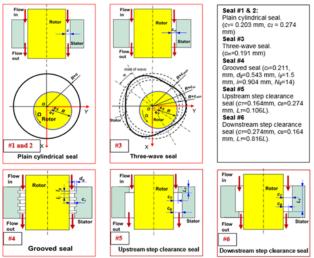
Schematic views of six test seals: plain, wavy, grooved and stepped configurations. Clearances exaggerated to illustrate the seal geometry.
